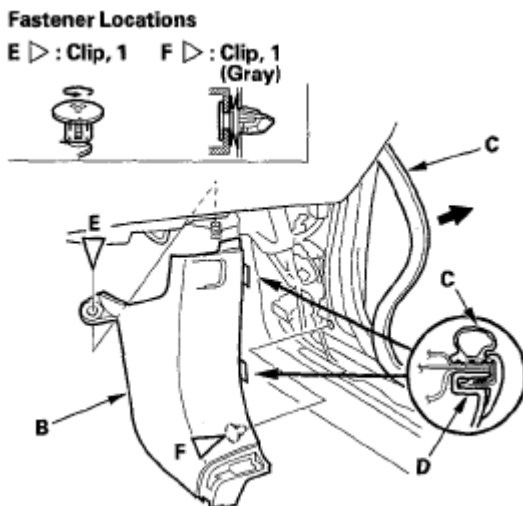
Identifying Door Opening Seal, Kick Panel Hooks And Clip - Passenger'S
